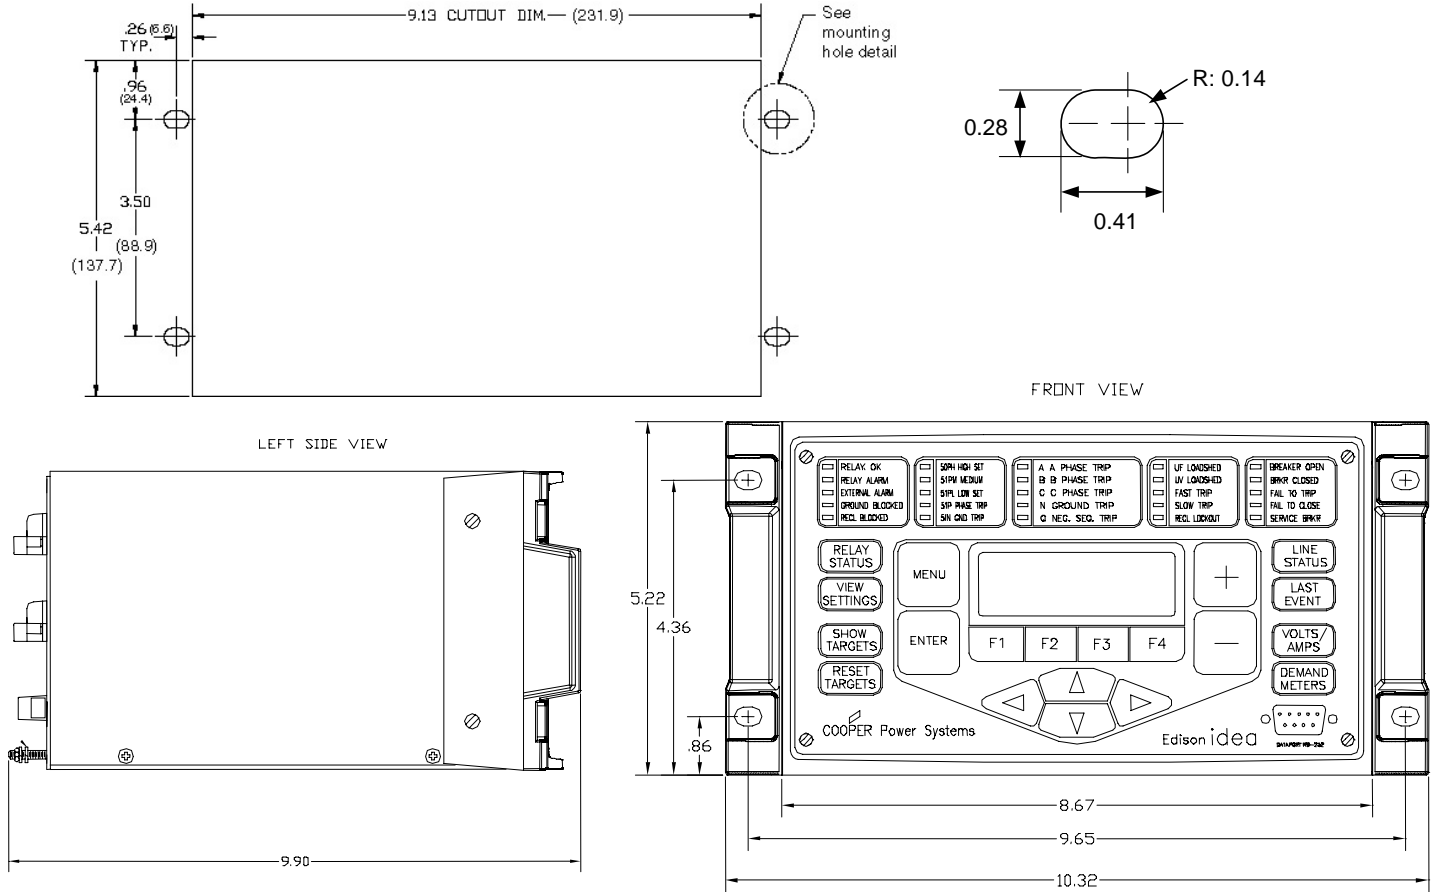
Edison Idea Relay Panel Cutout and Outline Dimensions in Inches (mm)
